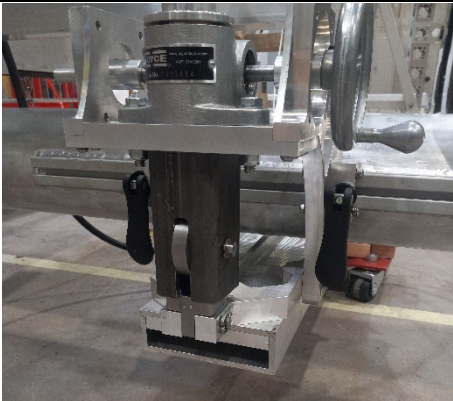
Remove clamping handles and T-nuts. The crossbeam is challenging to slide with clamping handles and T-nuts inserted.
